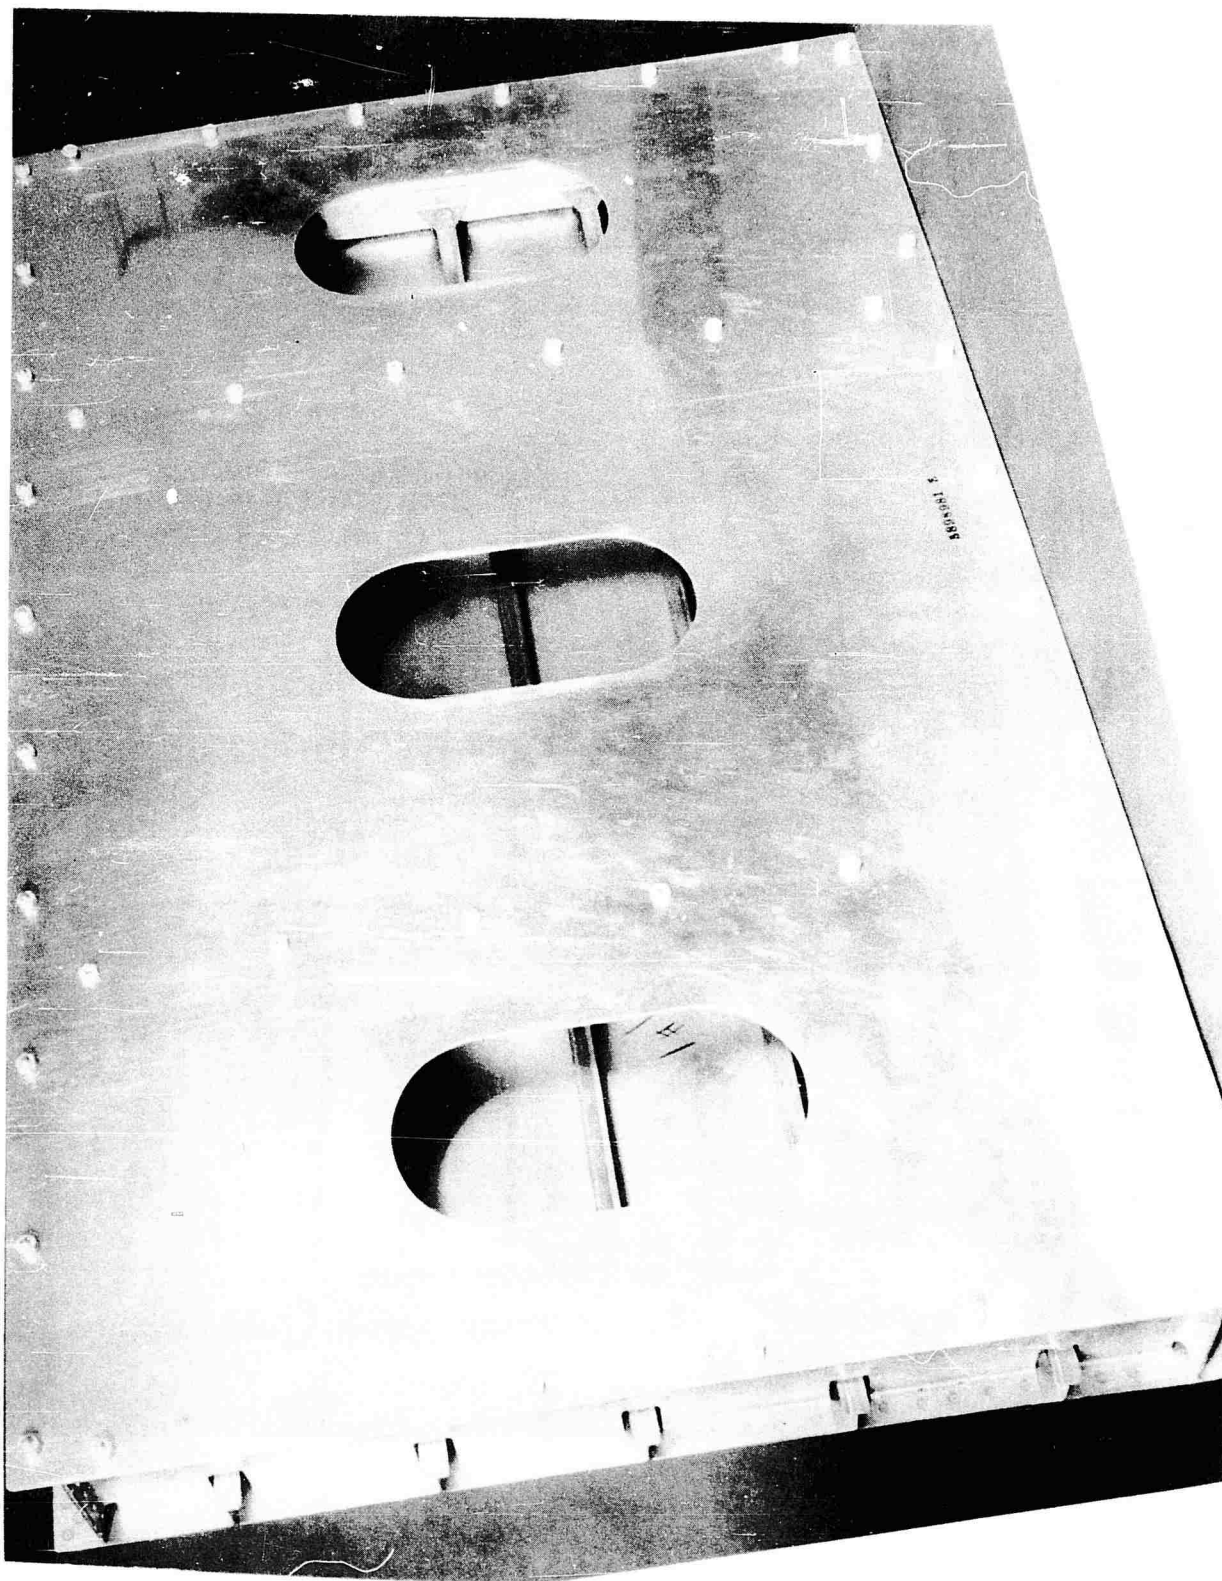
SKIN AND STRINGER - LOWER COVER INSTALLED
